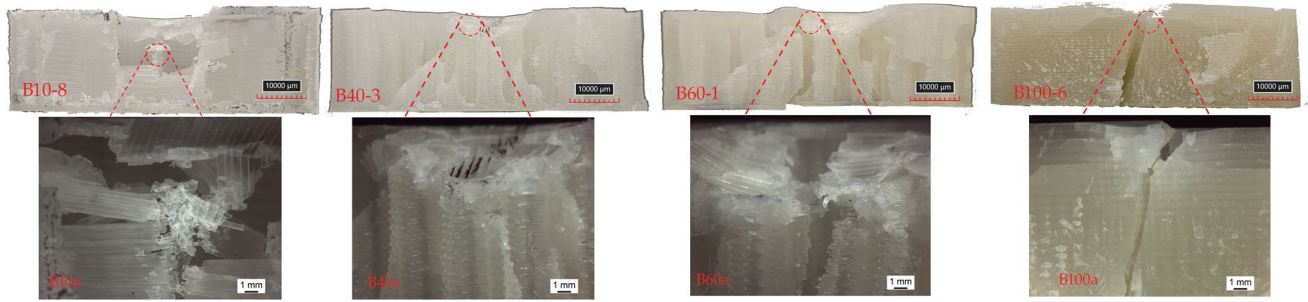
Visual inspection and microscopic images of the bulk specimens section after impact test
